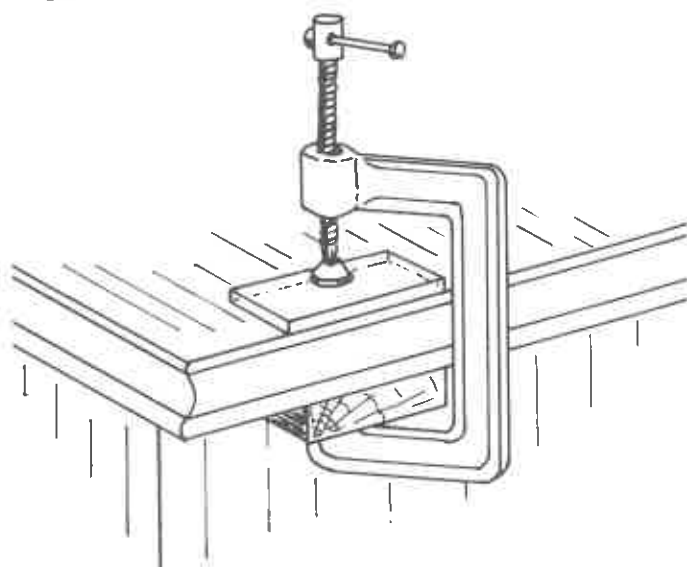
Clamping a section of re-laid veneer with a piece of Plexiglas under the clamp.
